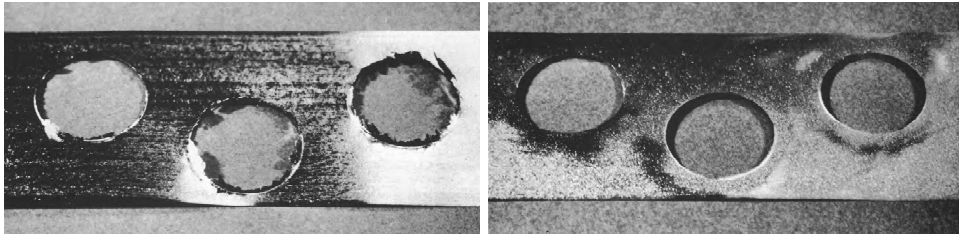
Hot die punch holes (left) and after abrasive process (right) [105].
